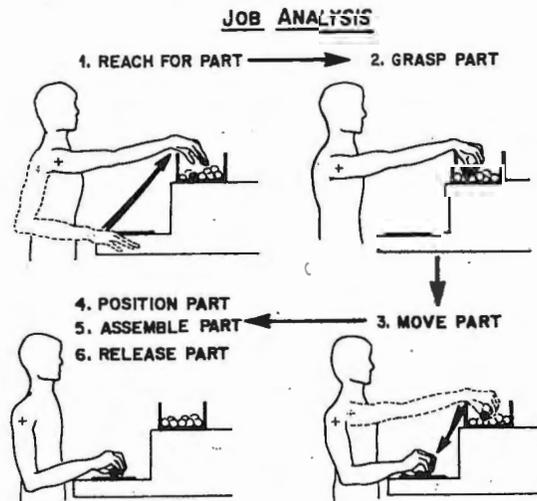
Assembling parts on a moving conveyor can be described by a series of six elements.
